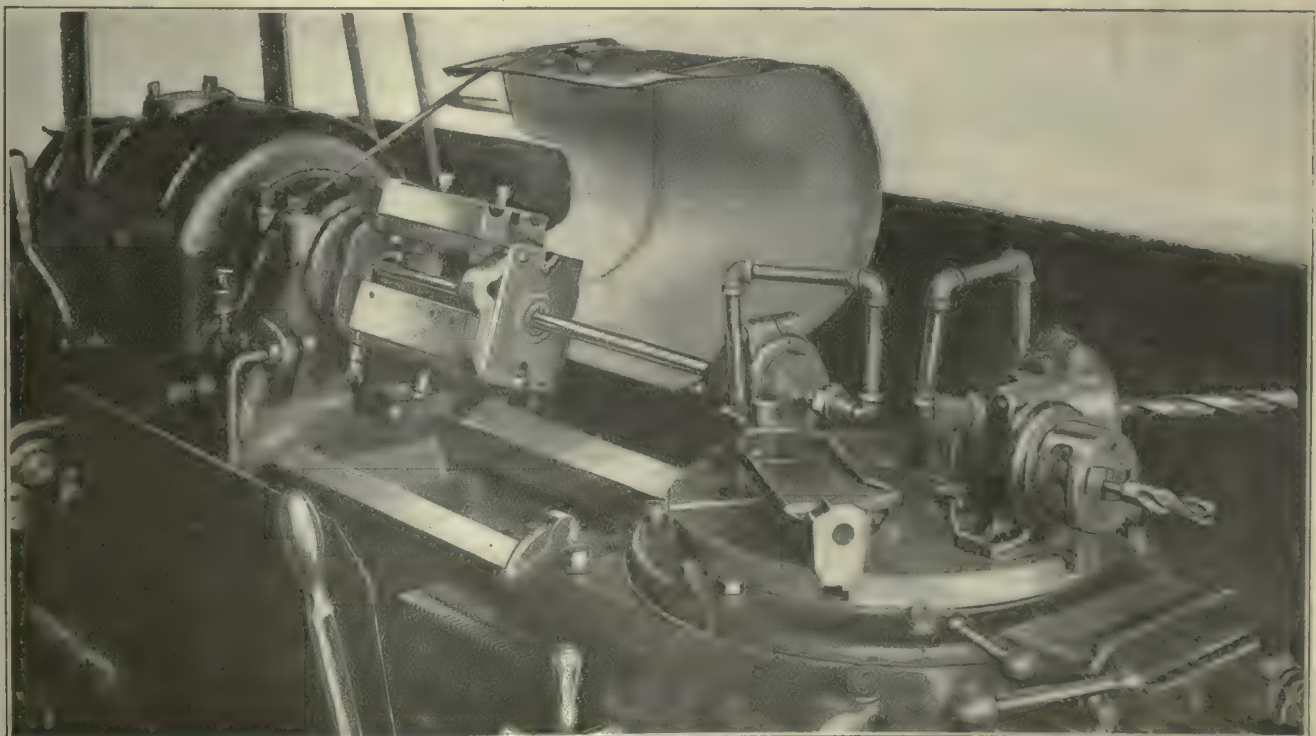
DRILLING AND REAMING THE MAIN HOLE THROUGH THE RECEIVER
